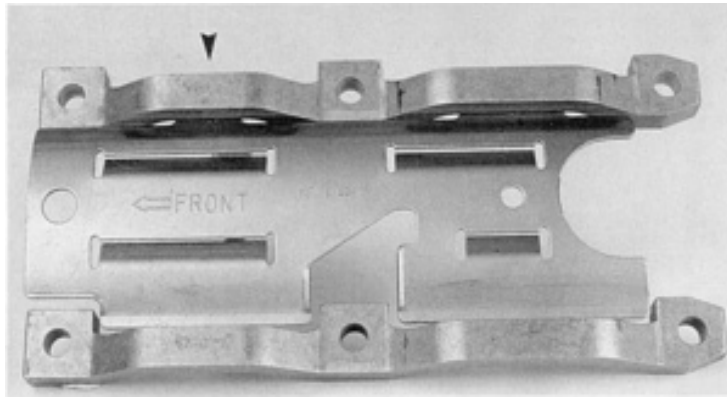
High-speed pulse weld of automotive engine bearing brace and windage baffle assembly. Brace rails are FN-0208 joined to AISI 1010 steel stamping. High-speed pulse weld assembly replaced an aluminum forging and reduced overall cost by 40%. Courtesy of Process Equipment Company
